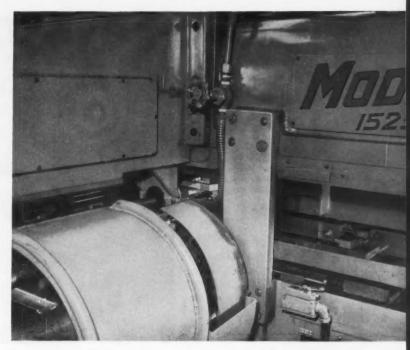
Roto-Flo machine for coldforming serrations on rear-axle shafts. Work-pieces, carried on fixtures, are automatically indexed along unit.
